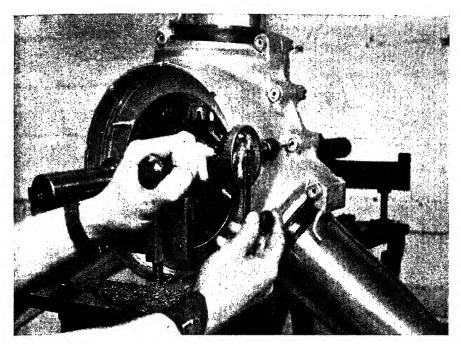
Lead wool of requisite amount is then drilled out if necessary to perfect the balance of assembly
